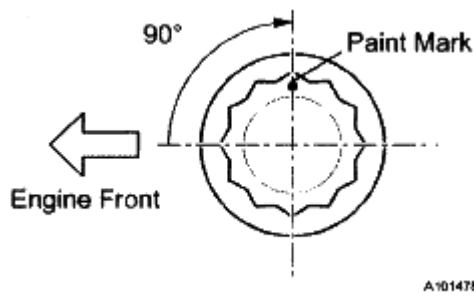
Identifying Connecting Rod Bolts With Paint Mark
